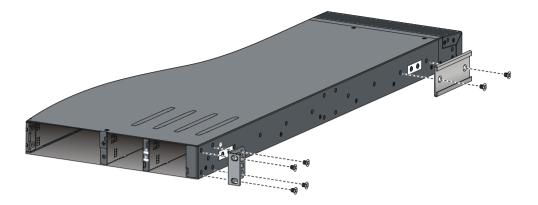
Attaching the mounting brackets and chassis rails to the HPE 5940 32QSFP+ switch (network port-side mounting position for the mounting brackets)
